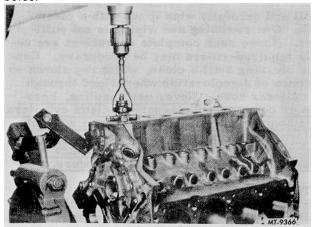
Honing Cylinder Bore Using SE-784 Cylinder Grinder
